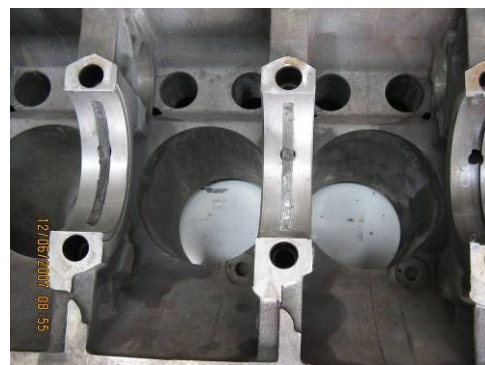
The remanufactured crankshaft bearing shell hole (after machining process)
